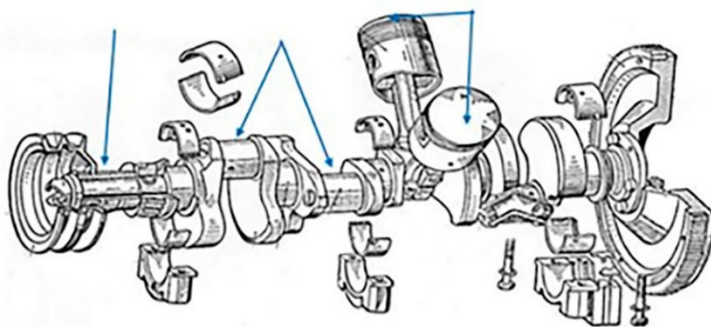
Places for applying ceramic coating to elements of the crank mechanism.
